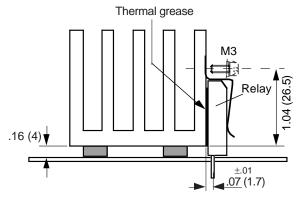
Mounting with L19100 clip; dimensions in inches (mm)
